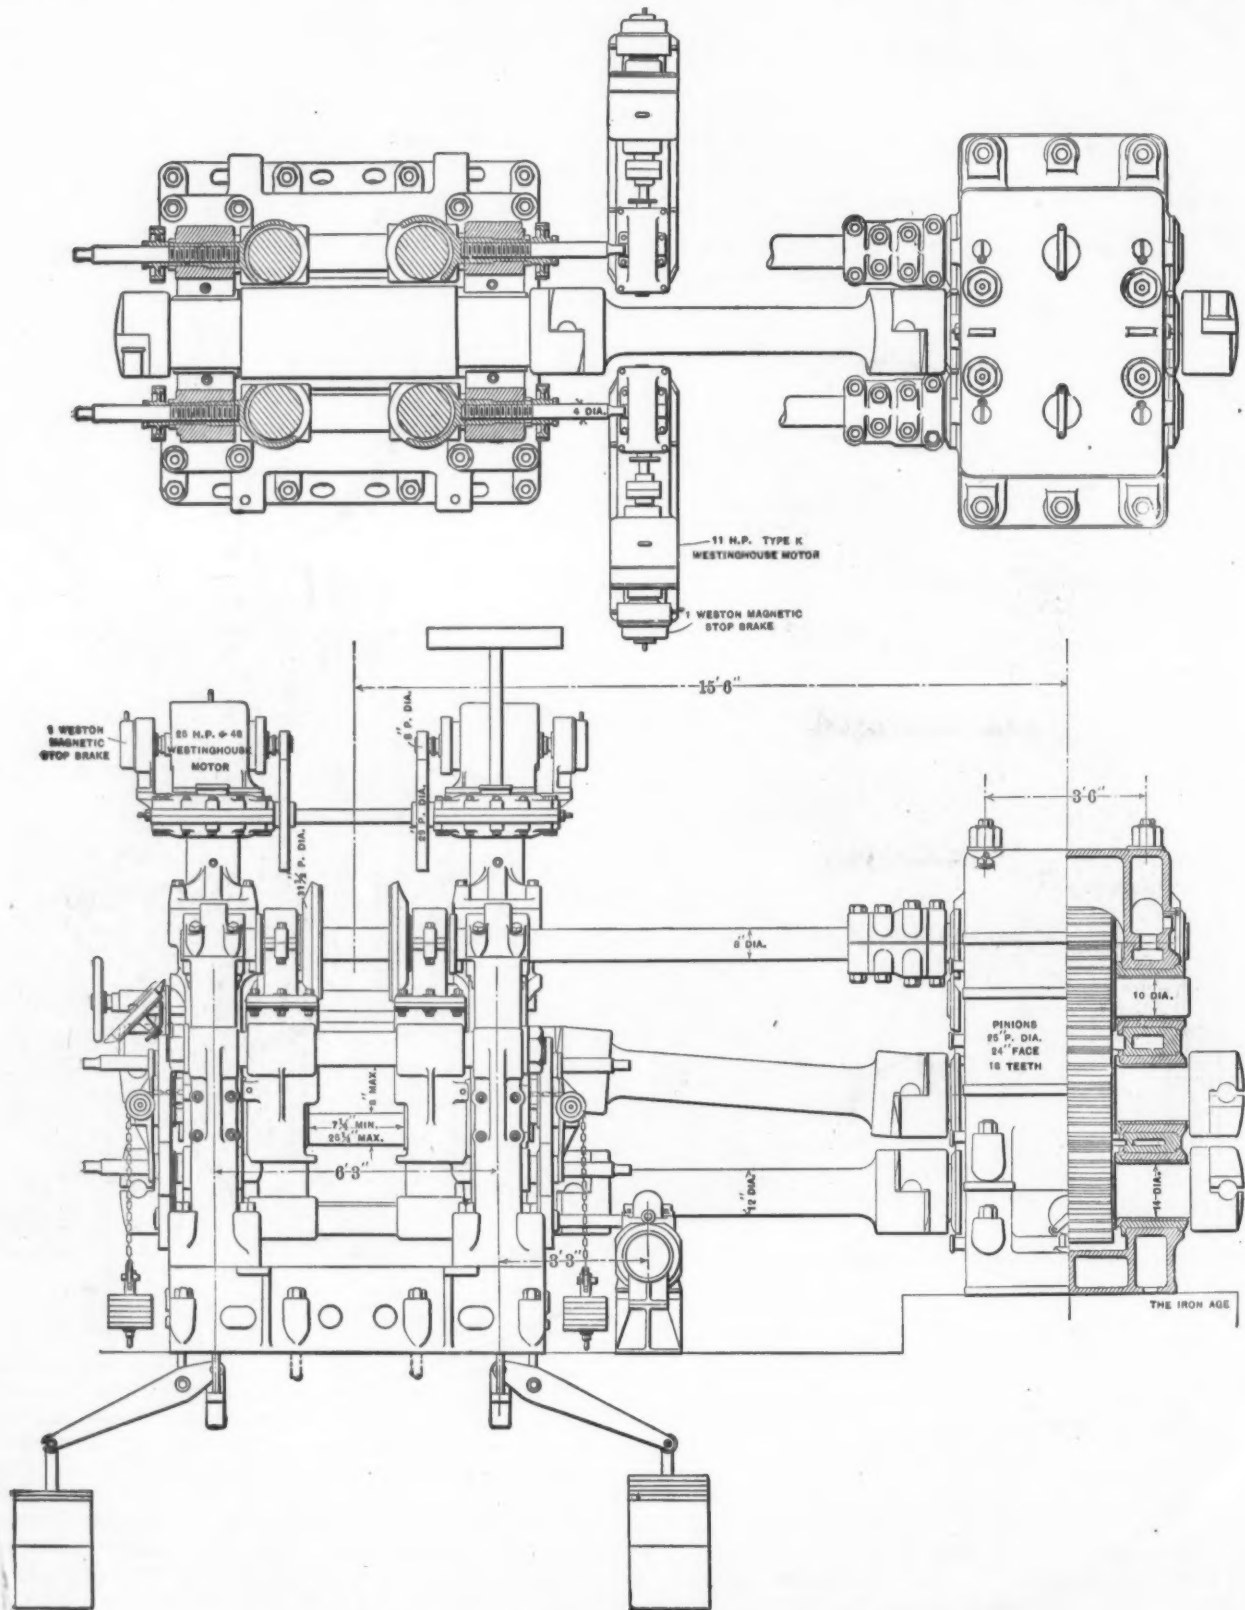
Plan and Elevation of Kennedy Universal Mill and Pinion Housing.
